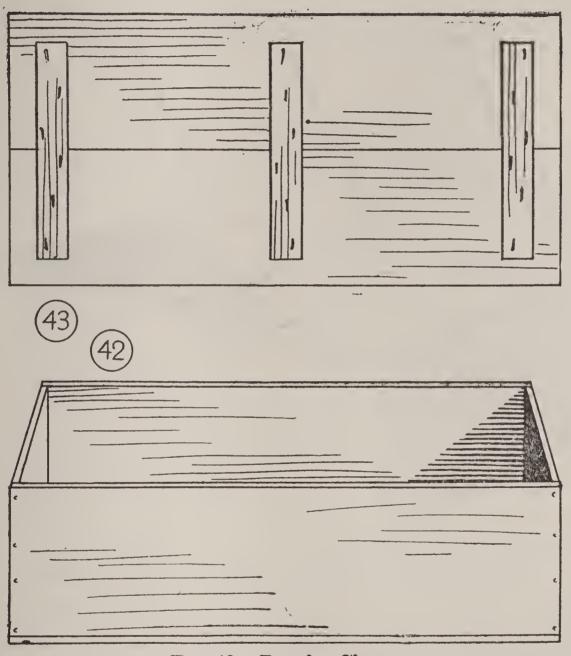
Box for Chest. Fig. 43.—Cover.
